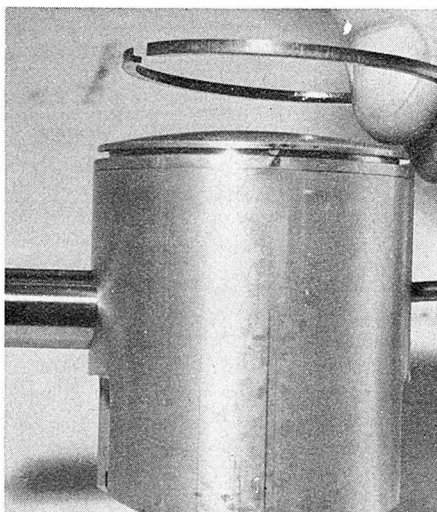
"L" shaped piston ring used in Super Rat. Ring is designed to provide maximum compression sealing and minimum friction.
